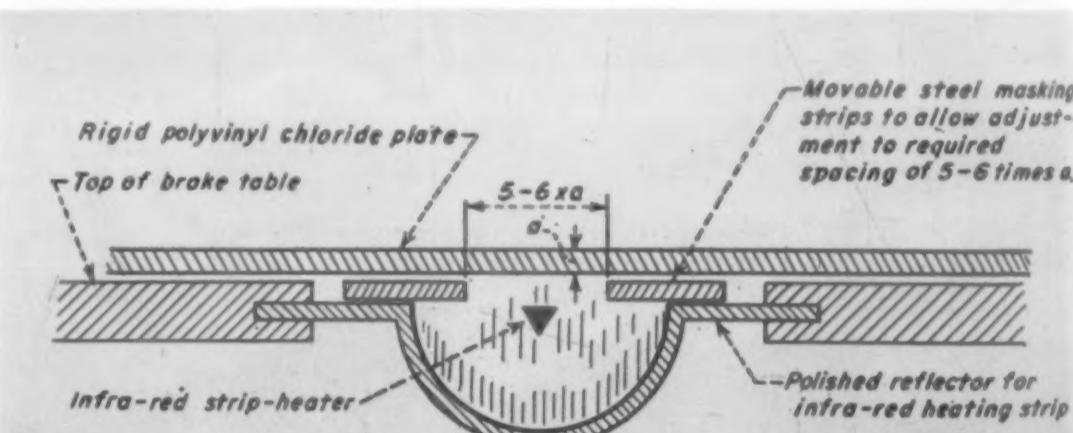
Schematic view of heating arrangement for bending brake using infra-red strip heaters.
